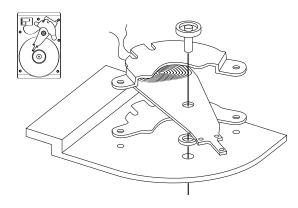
Top view of a hard drive and exploded view of the cut-out base plate, actuator arm, axis, and magnet assembly.
